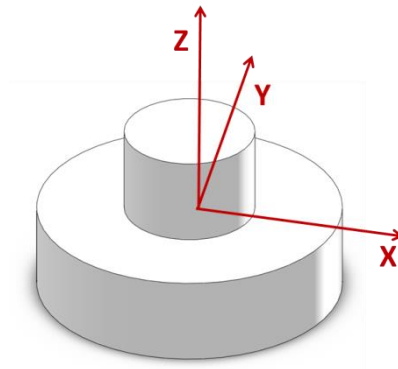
Measurement setup for calibration of male part (top) and female part (bottom) from the cylindrical multi-material assembly using the OMC.
